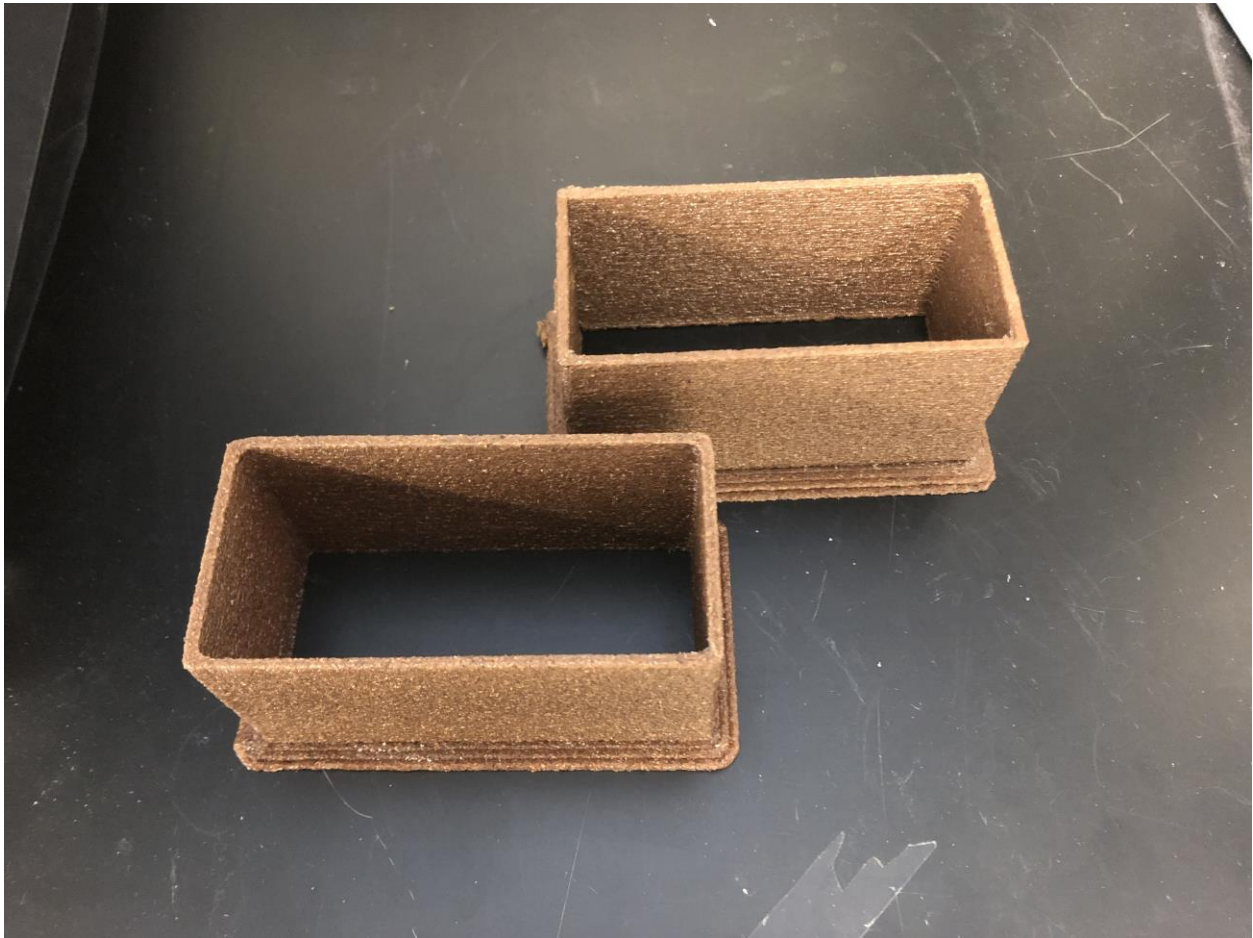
3D printed test samples from scaled-up PLA/WF/CNF composite manufacture.
